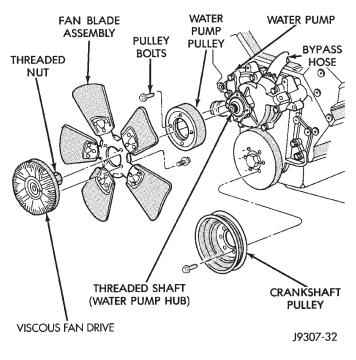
Fan Blade and Viscous Fan Drive—5.2L Engine
